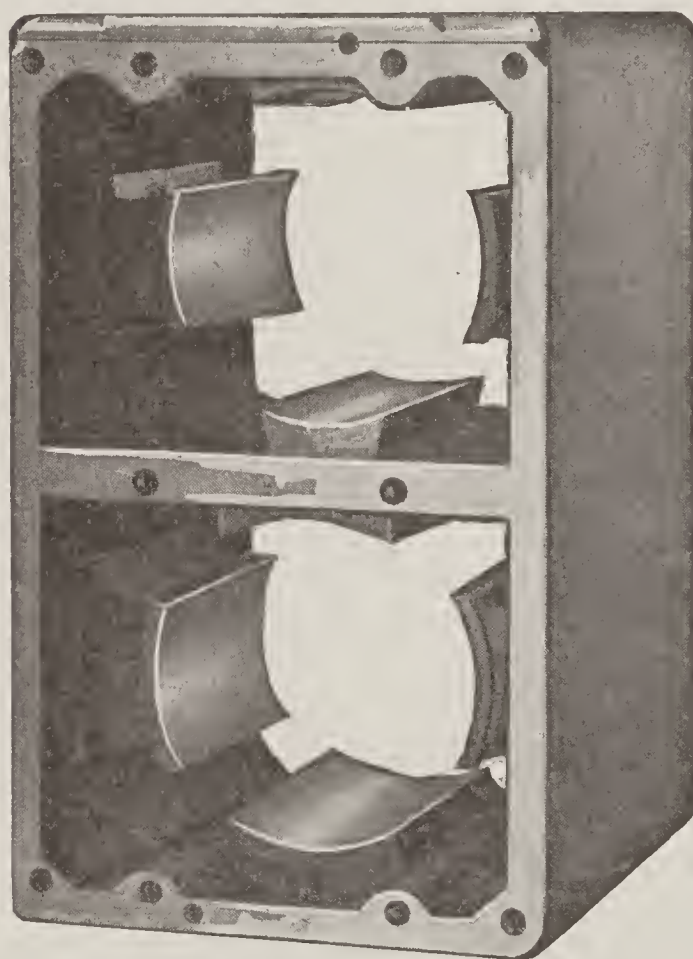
Combined Field Frame of Generator and Motor for Remy Single-Unit System
